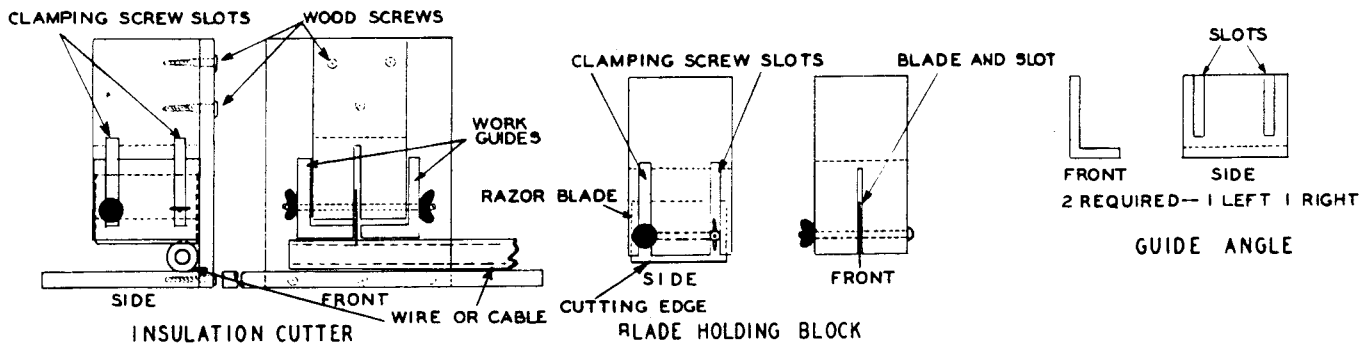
DETAILS OF ALTERNATIVE INSULATION CUTTER TO BE MADE IN THE FIELD
